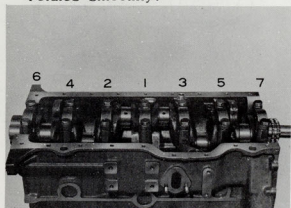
Bearing Cap Bolts Tightening Sequence W9135
